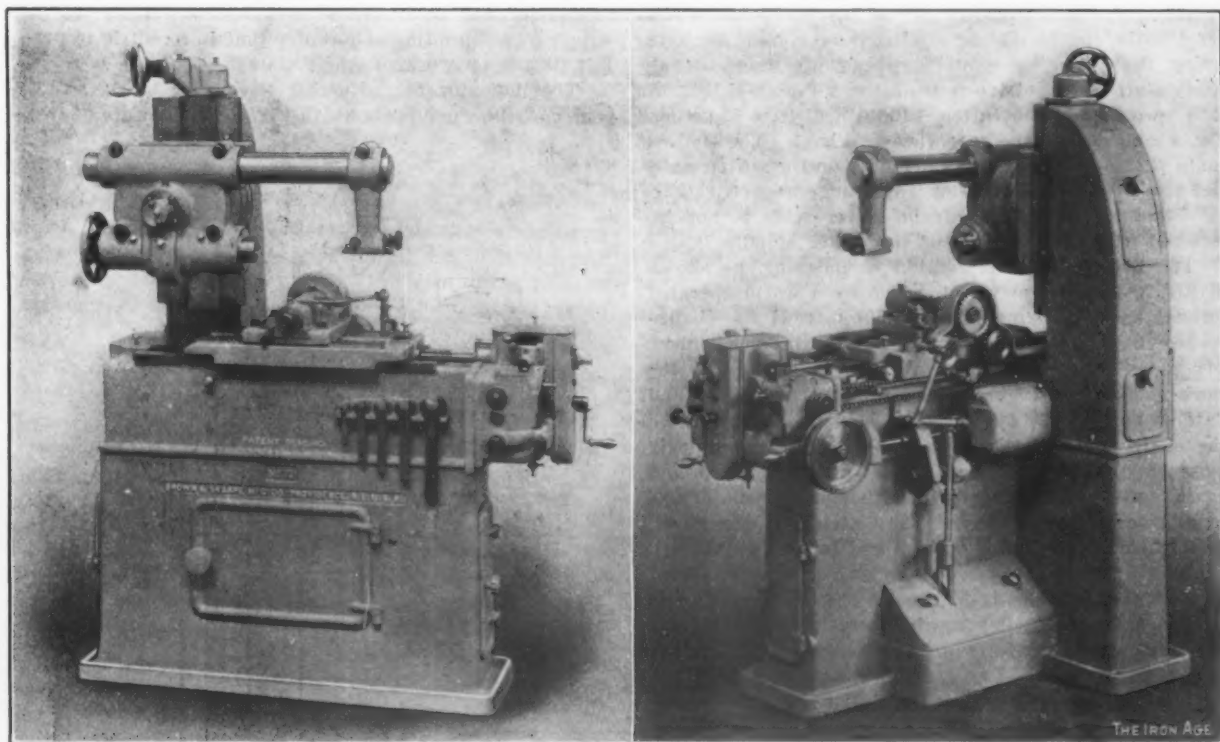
Front and Rear Views of the New Brown & Sharpe No. 12 Automatic Gear Cutting Machine.
